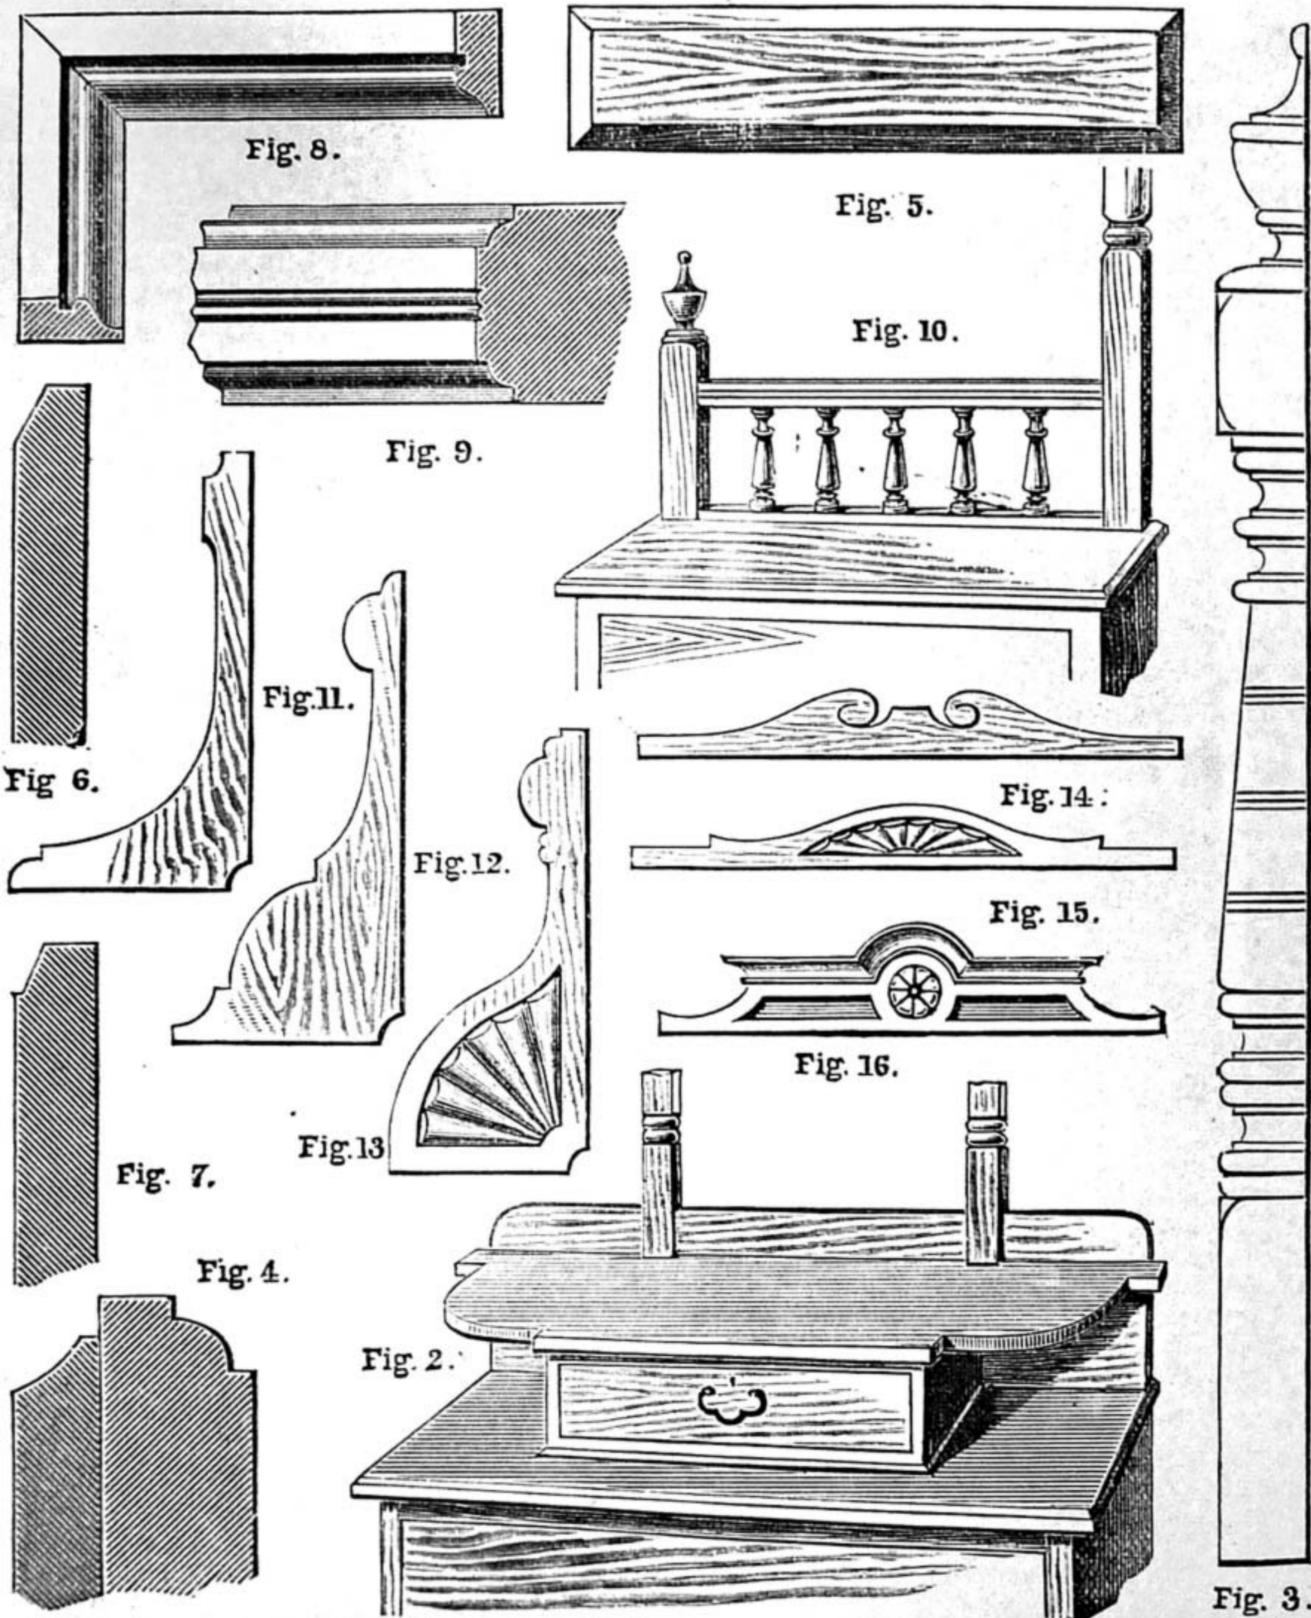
Jewel Box for Small Chest. Fig. 3.—Members of Turned Column. Fig. 4.—Moulded and Lined-up Top. Fig. 5.—Drawer with Bevelled Edges. Fig. 6.—Edge with Plain Bevel. Fig. 7.—Edge with Sunk Bevel. Fig. 8.—Moulding round Drawer Front. Fig. 9.—Alternative for Edges of Drawer Bearers. Fig. 10.—Spindle Gallery at Back of Jewel Boxes. Figs. 11, 12, 13.—Brackets for Glass Standards. Figs. 14, 15, 16.—Pediments.
